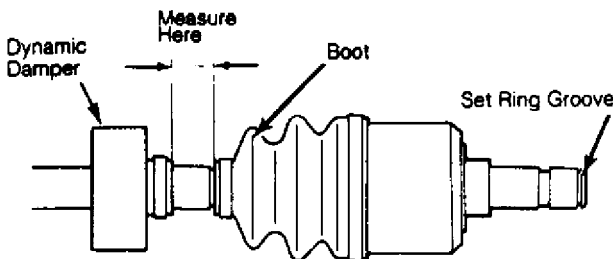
Measuring Distance Between CV Boot & Dynamic Damper
